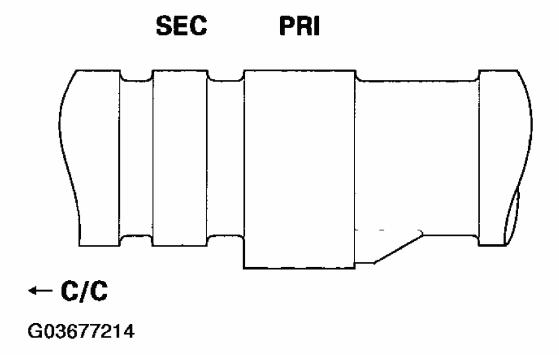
Identifying Cam Lobe Height Courtesy of AMERICAN HONDA MOTOR CO., INC.
